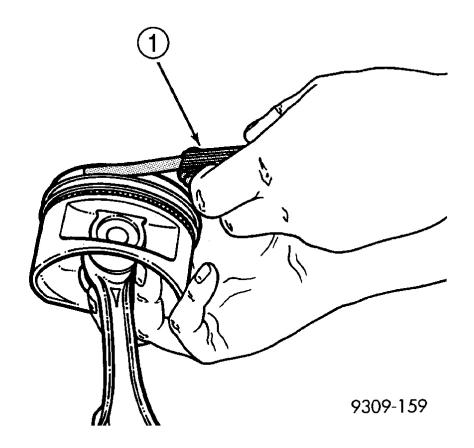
Measuring Piston Ring Side Clearance Courtesy of CHRYSLER LLC
